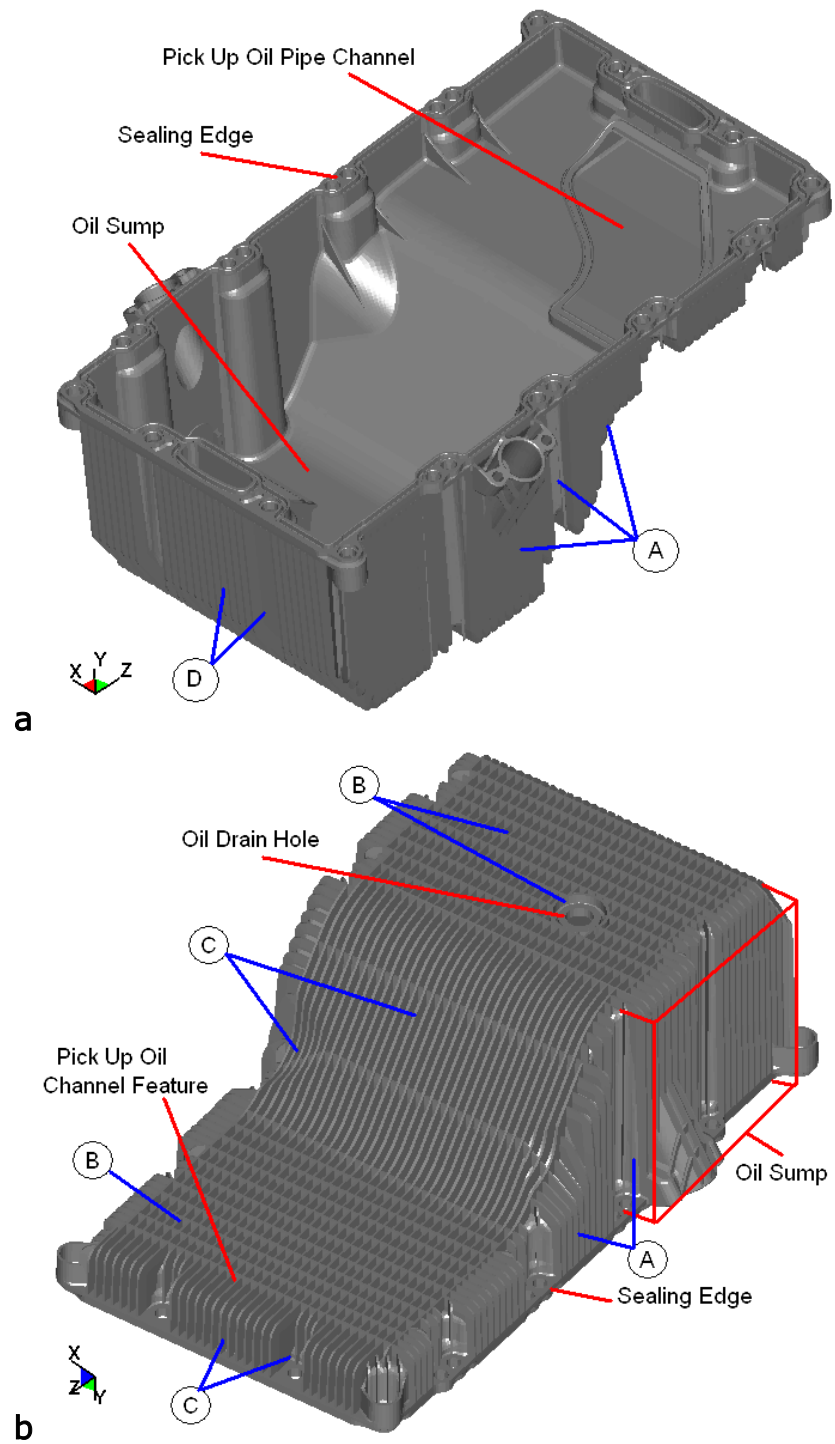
Improved version of the oil pan and key areas, a) inner view, b) outer view
